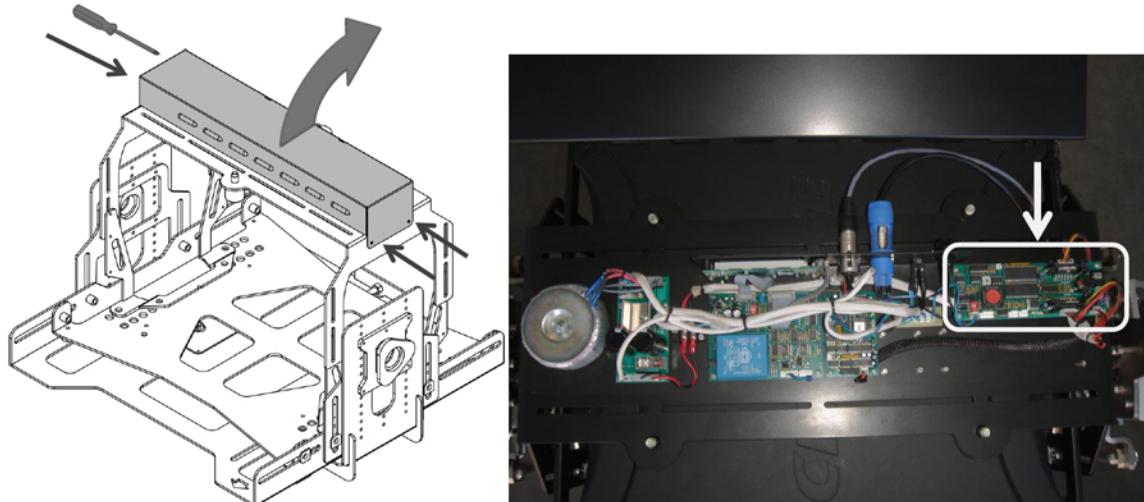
Head Box Cover Removal and Zoom and Focus Board Location
